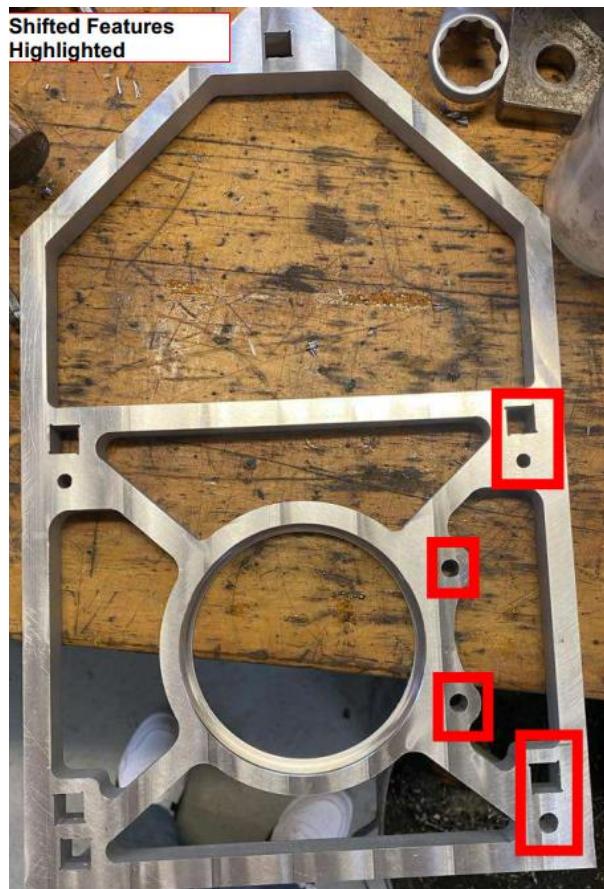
Drivetrain VI Waterjet Cut Shifted Brake Plate
